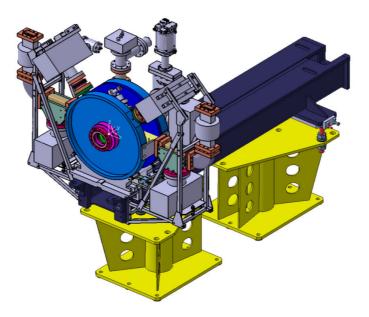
3D CATIA drawing of the gun.
